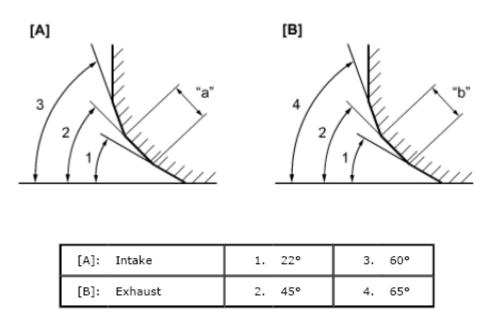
Identifying Exhaust Valve Seat Angle Courtesy of SUZUKI OF AMERICA CORP.
